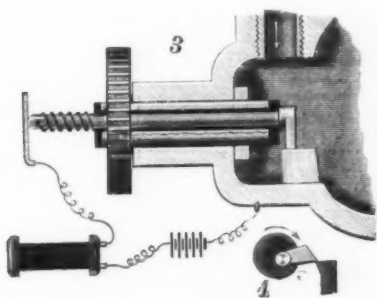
IGNITER FOR GAS ENGINE—RECIPROCATING FORM.
